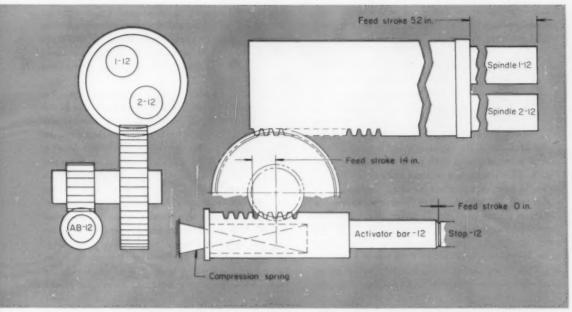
Mechanism for activating spindle advance, Spindles advance with head until activator bars contact the stops to initiate quill feed.
